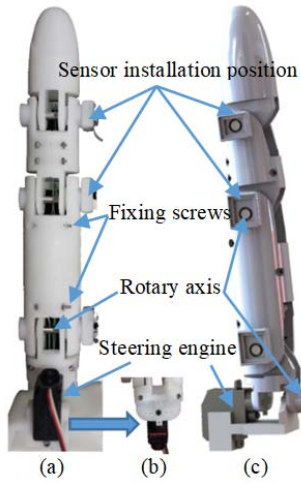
Bionic finger (a) prototype (b) installation of steering engine (c) three-dimensional model
